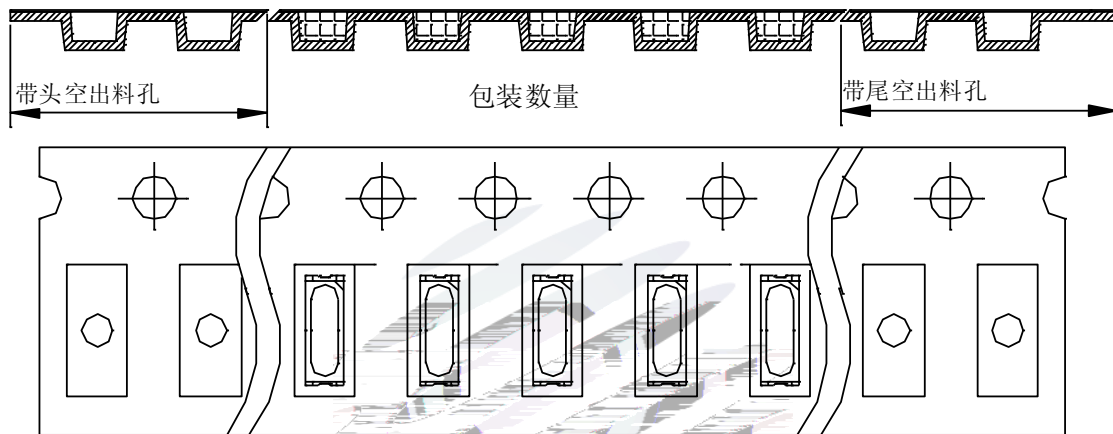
Carrier Tape Dimensions 载带尺寸
